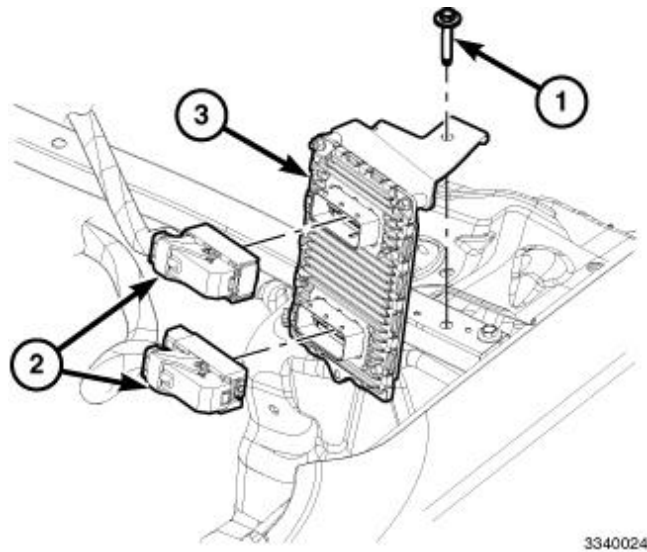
Retaining Bolt, PCM Electrical Connectors & PCM
